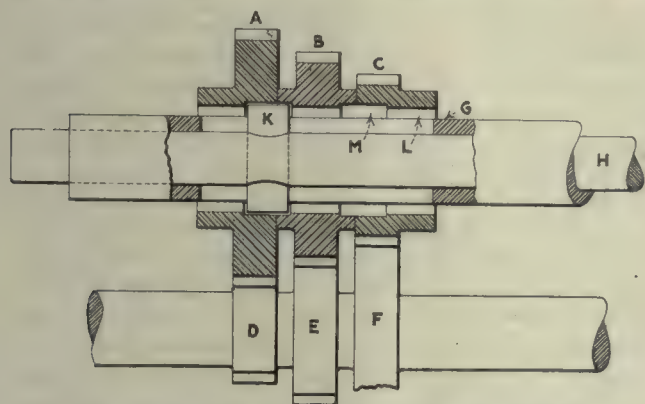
THREE-SPEED PULL-PIN GEARSHIFT
